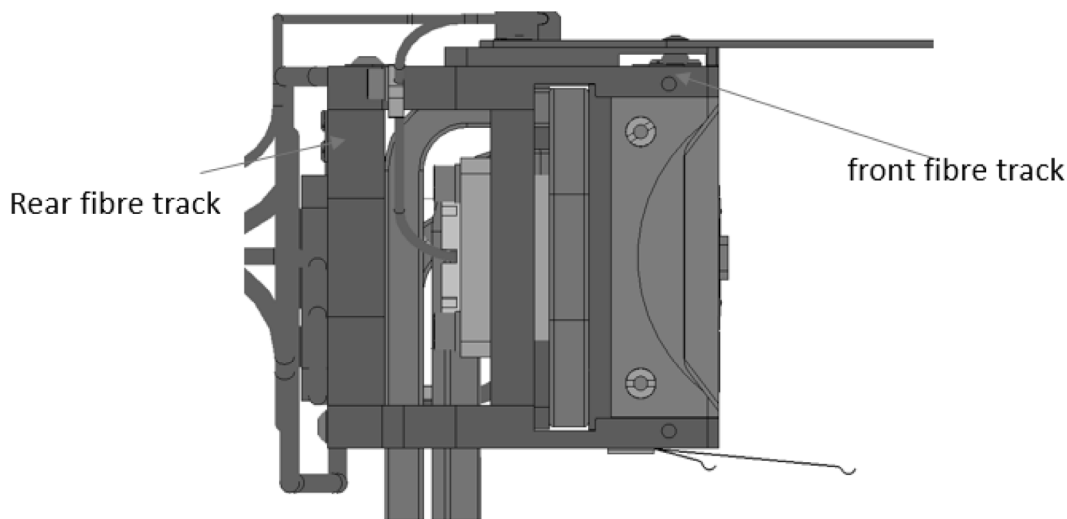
End view of the collimator jaw showing front and rear fiber track placement (Courtesy of T. Furness et al. [10]).
